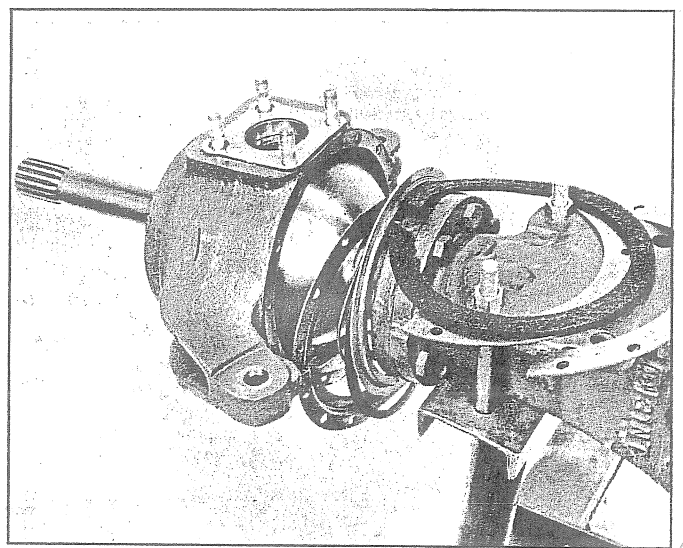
View Showing Seals and Bearing Trunnions Removed
